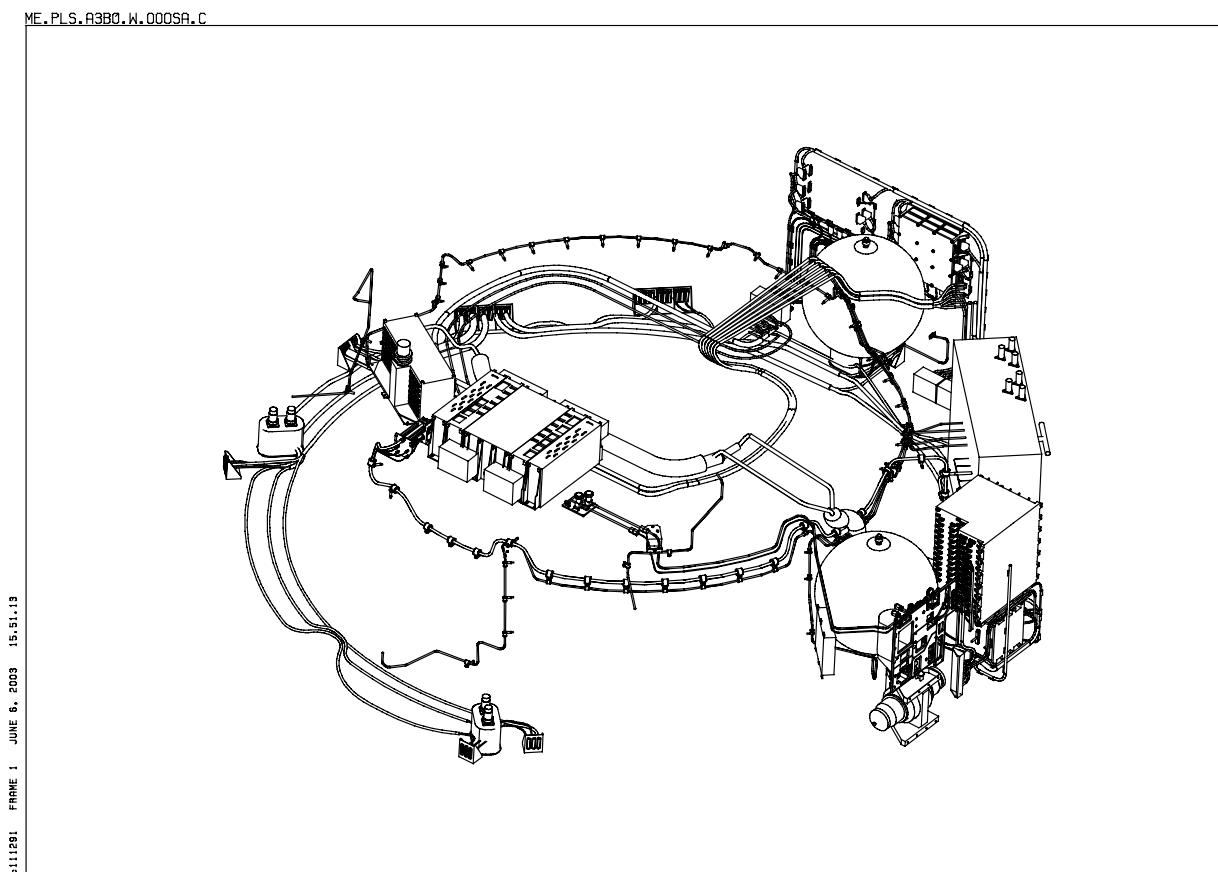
SVMD equipment (spheres excepted, not mounted)
